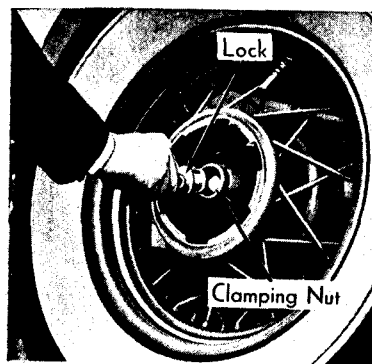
The clamping nut may be reached after unlocking and removing the lock.
